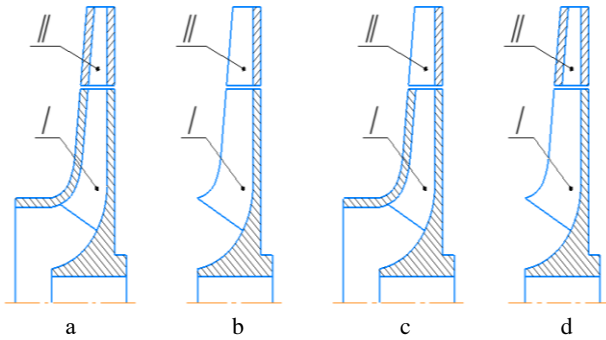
Contra-rotating stages: a – closed impeller and closed blade disc; b – semi-opened impeller with semi-opened blade disc; c – closed impeller and semi-opened blade disc; d – semi-opened impeller and closed blade disc
